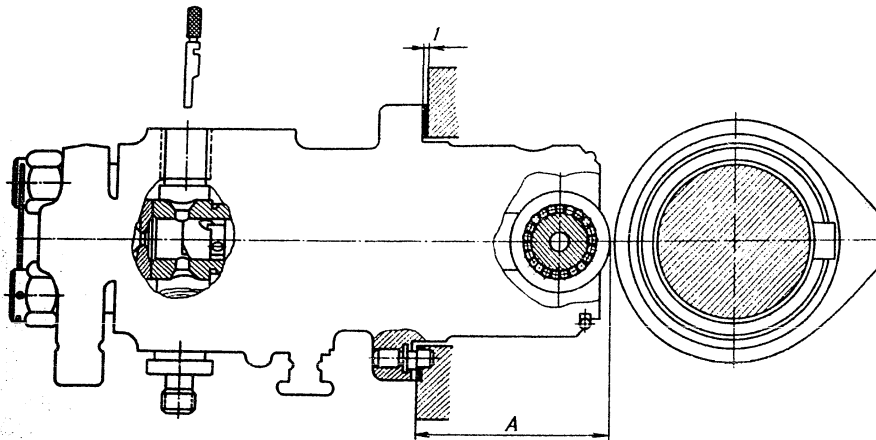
INSTALLING THE FUEL INJECTION PUMP ON DIESEL ENGINE
